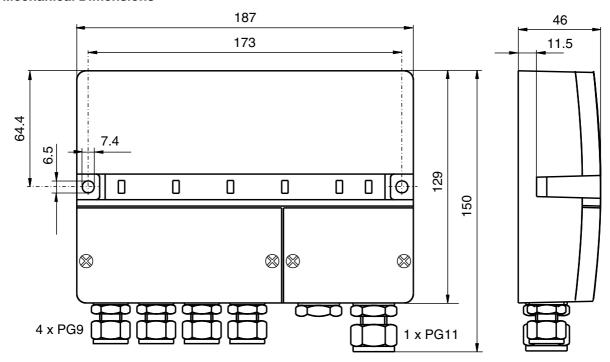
Mechanical dimensions of Valve Coupler FD0-VC-Ex4.PA
